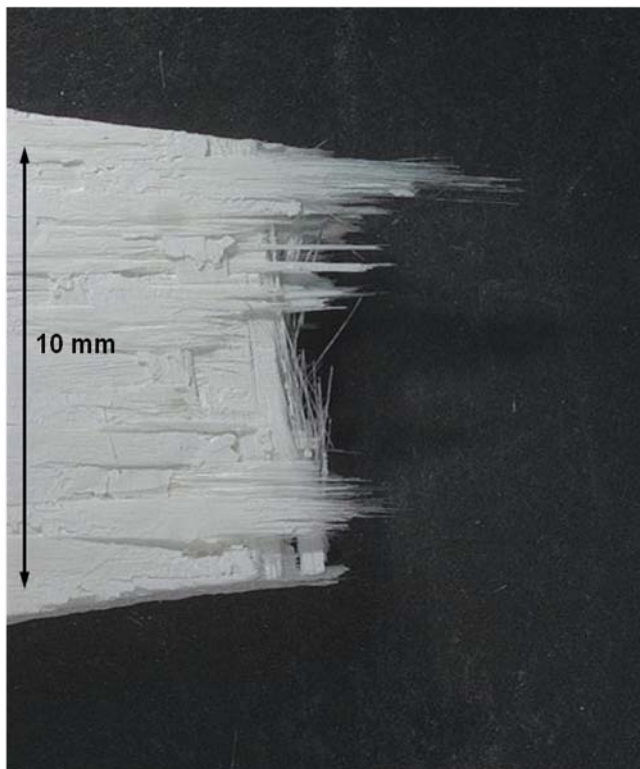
Fracture surface of the N720/AM specimen(2) tested in tension to failure with constant loading rate of 25MPa at 1100°C in steam.
